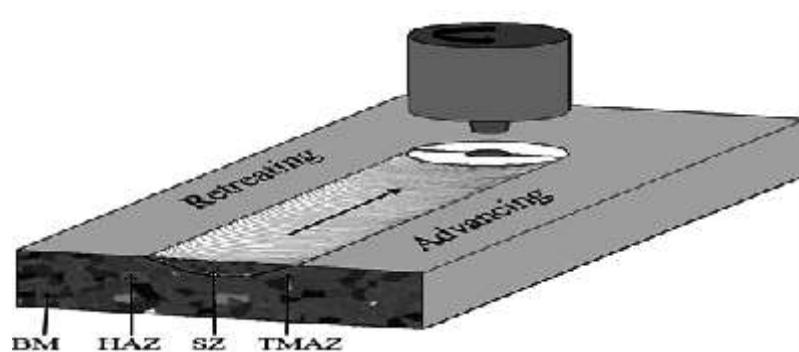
Schematic Drawing of Friction stir Welding
